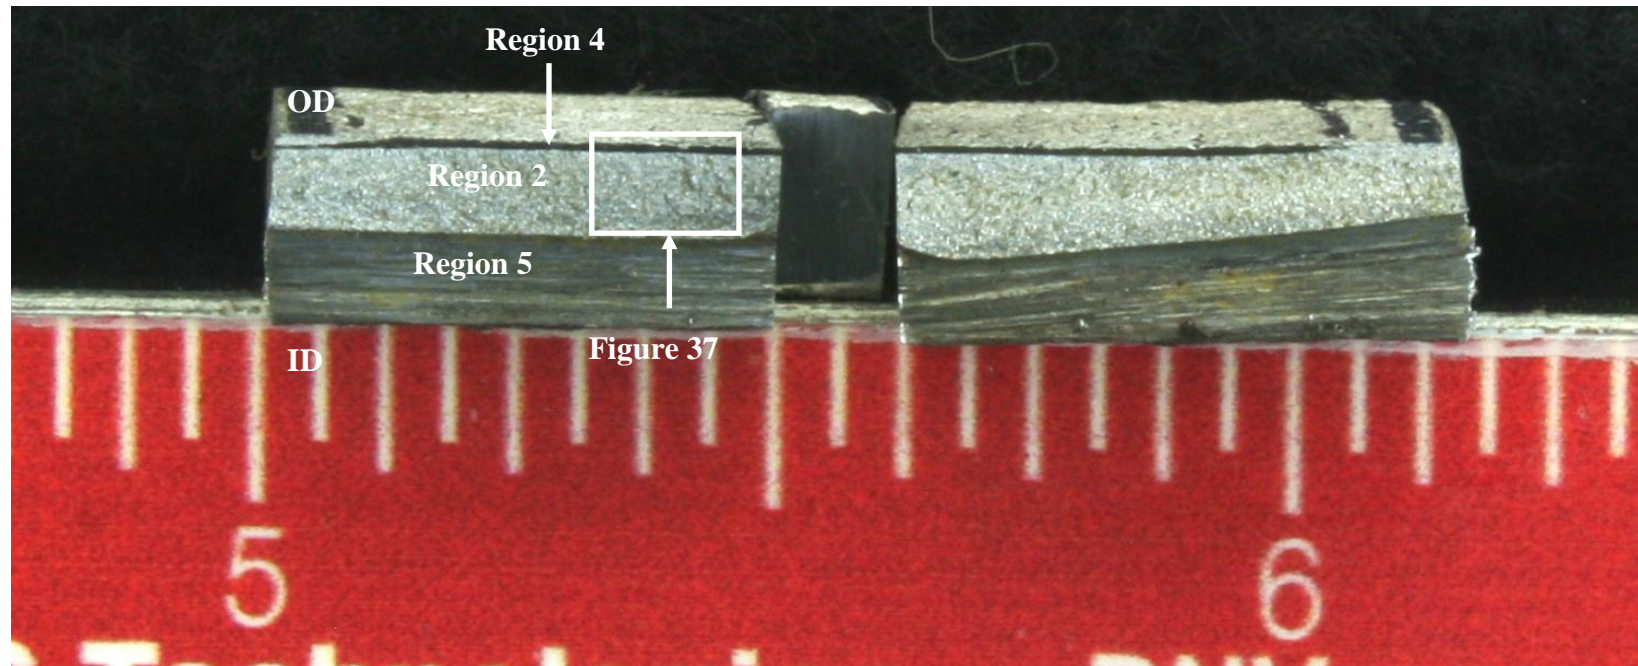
Photograph of the fracture surface removed from the feature near Crack Colony 5.
